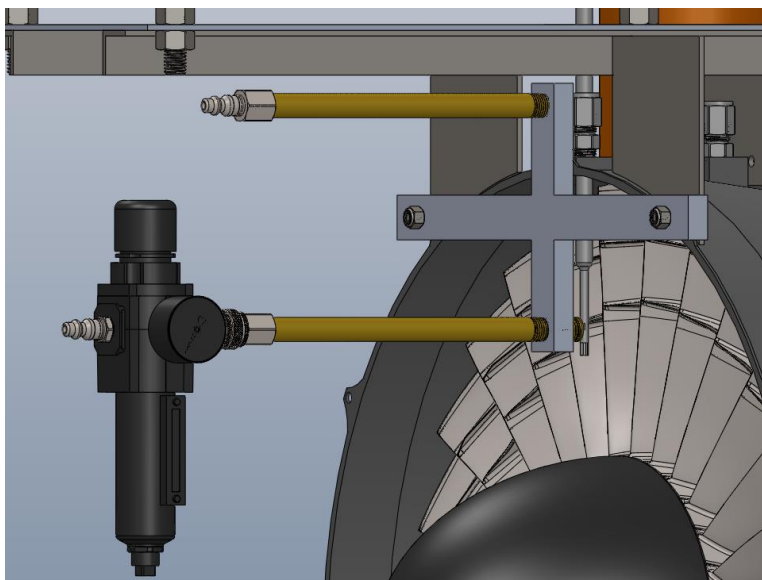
Five-Hole Three-Dimensional Flow Probe Alignment Nozzle
